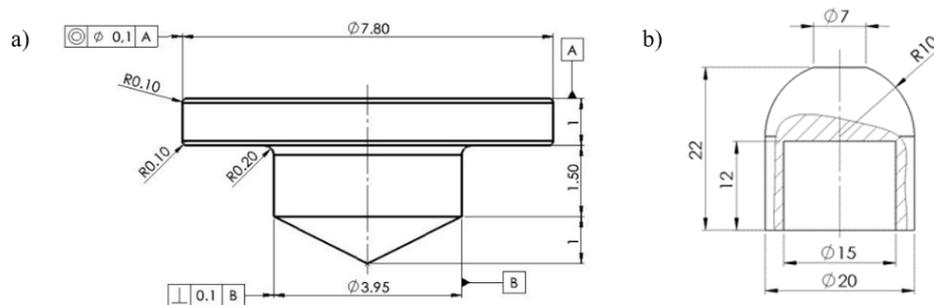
a) Dimensions of specimens; b) Specimens after welding prepared for testing
